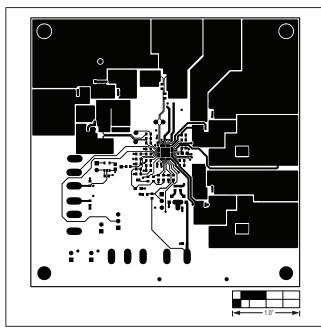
MAX17085B EV Kit PCB Layout—Component Side
